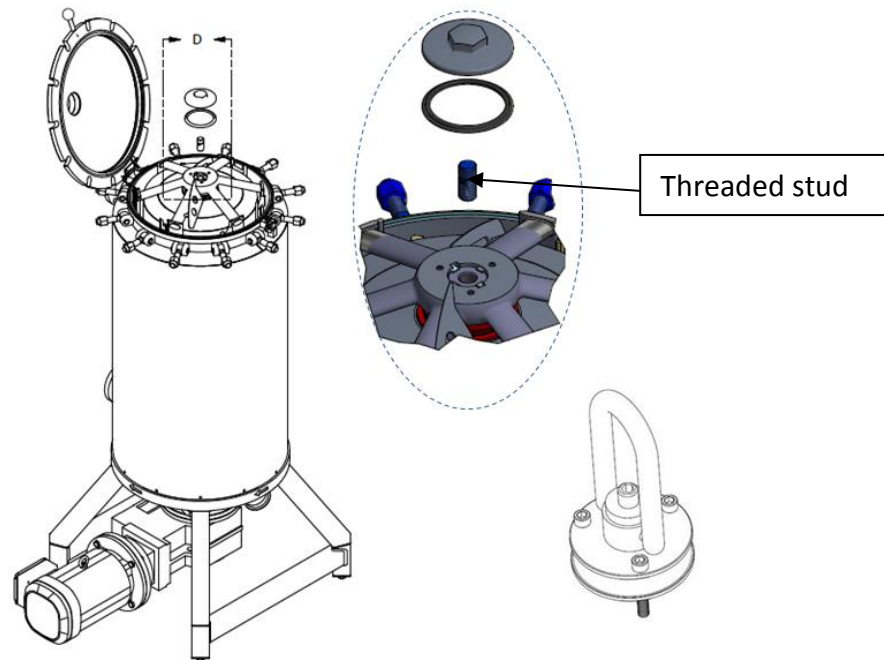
Cage cap & gasket & Cage Extraction Tool (CET)
